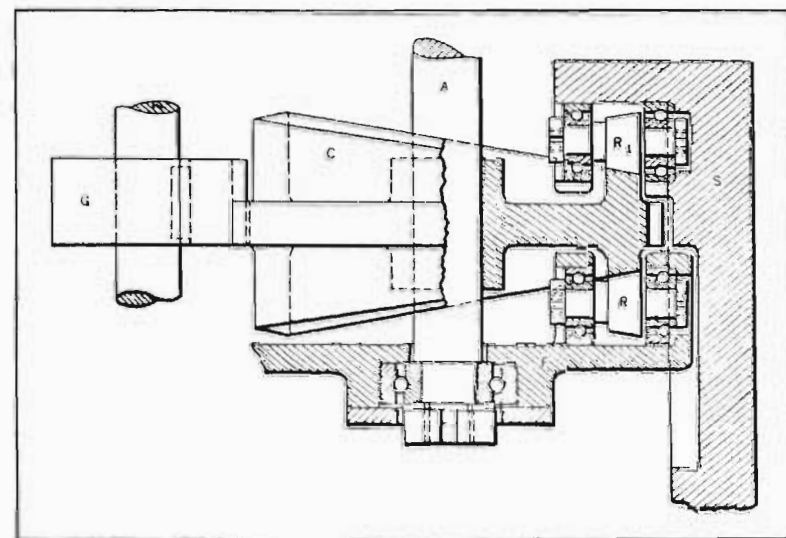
Double-faced Cam which Moves Driven Slide a Distance Equal to Sum of Leads of Both Faces
